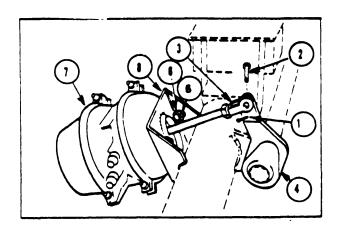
Trailer Brake Air Chamber Assembly (ARMY)
